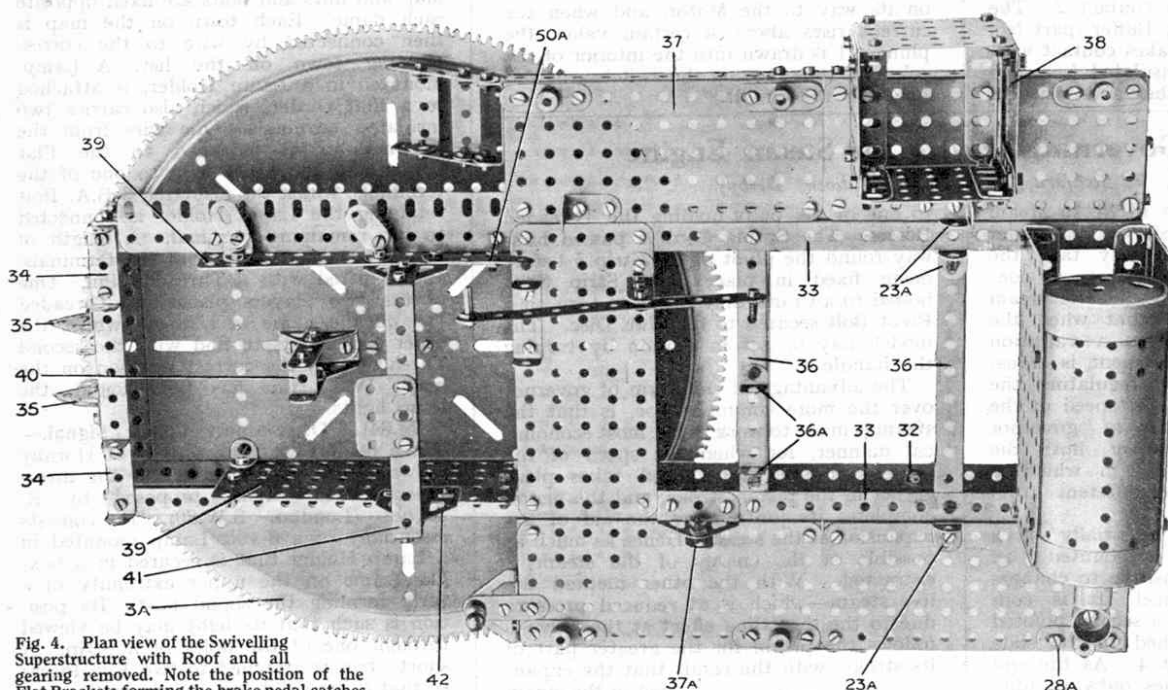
Plan view of the Swivelling Superstructure with Roof and all gearing removed. Note the position of the Flat Brackets forming the brake pedal catches.
